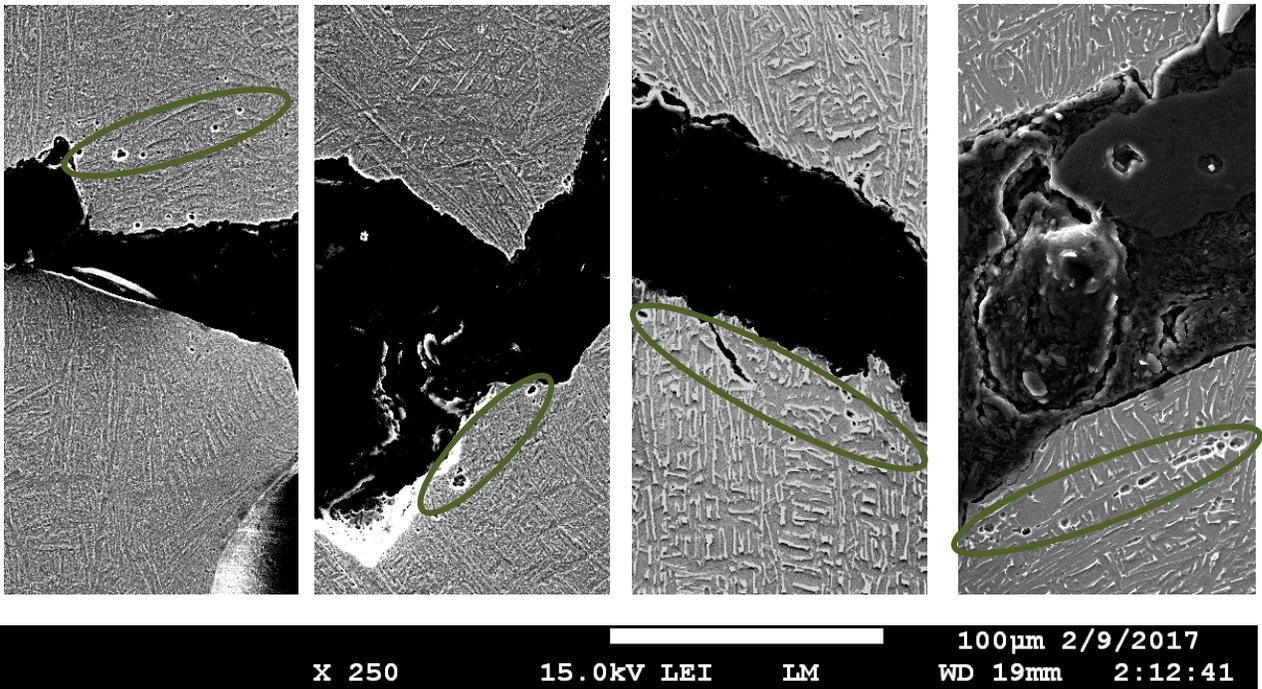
END OF OVERLOAD FRACTURE OF TRANSVERSE SR TEST PIECE FT2
